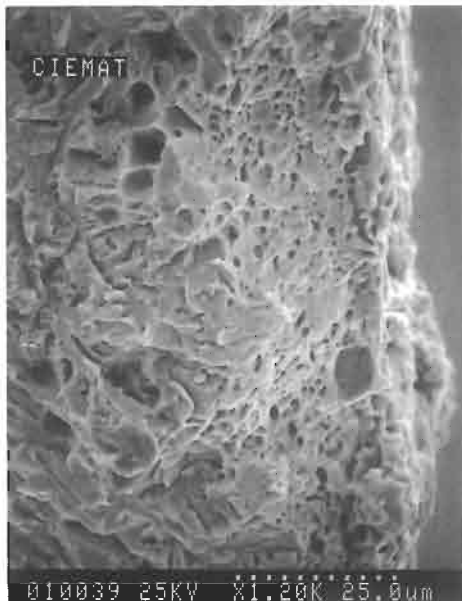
Fracture surface of the failed chromium-plated sleeve (I.D.).
